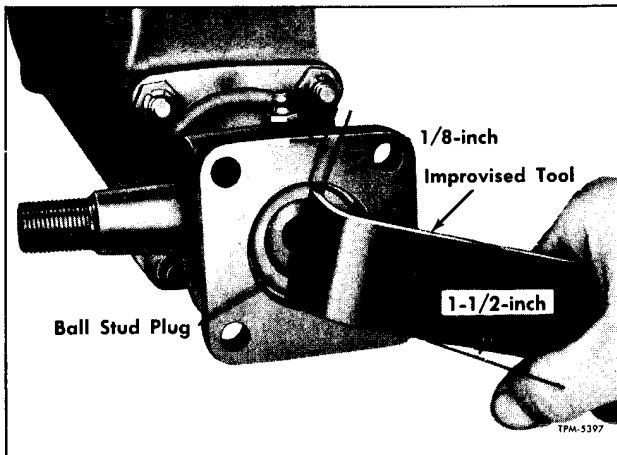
Removing Ball Stud End Plug with Improvised Tool
